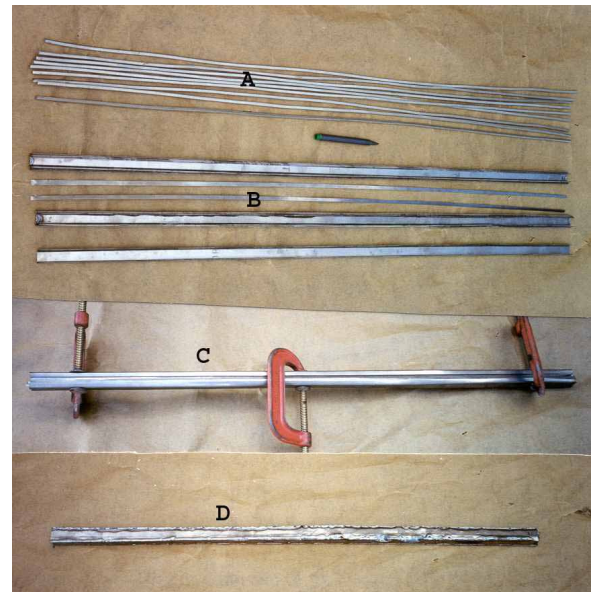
Mounting sequence of feeding charge. (A) nickel bars; (B) titanium sheets; (C) assembling Ni+Ti for welding and (D) TIG welded charge.
